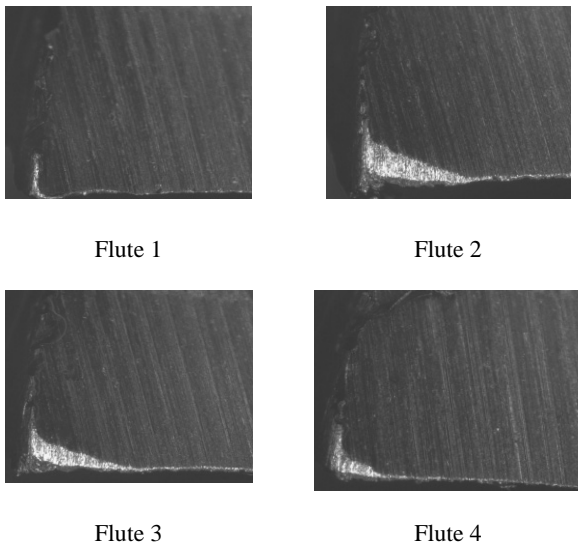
Flank wear under MQL machining at cutting speed of 10m/min for 90 min
